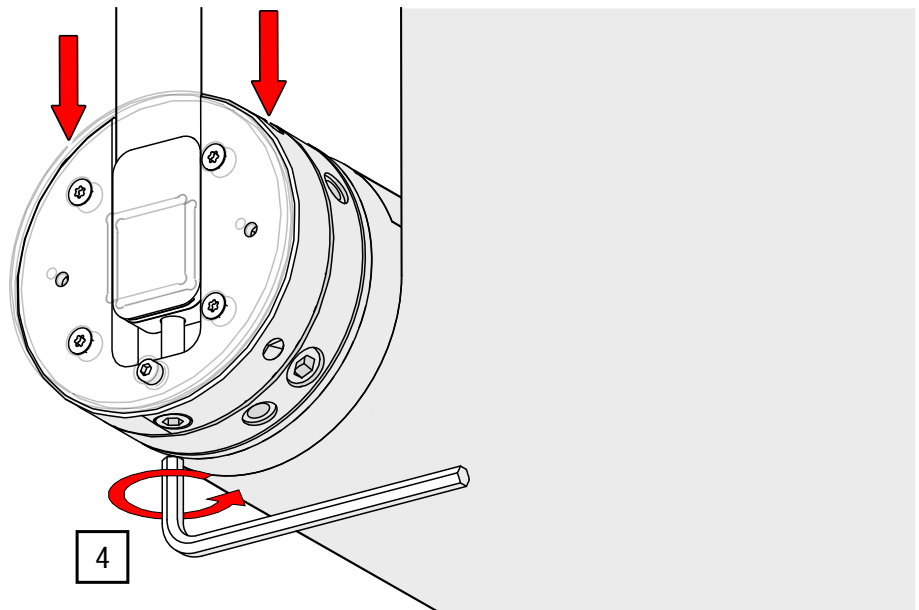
Setting the levelling – Adjusting the winding shaft downwards
